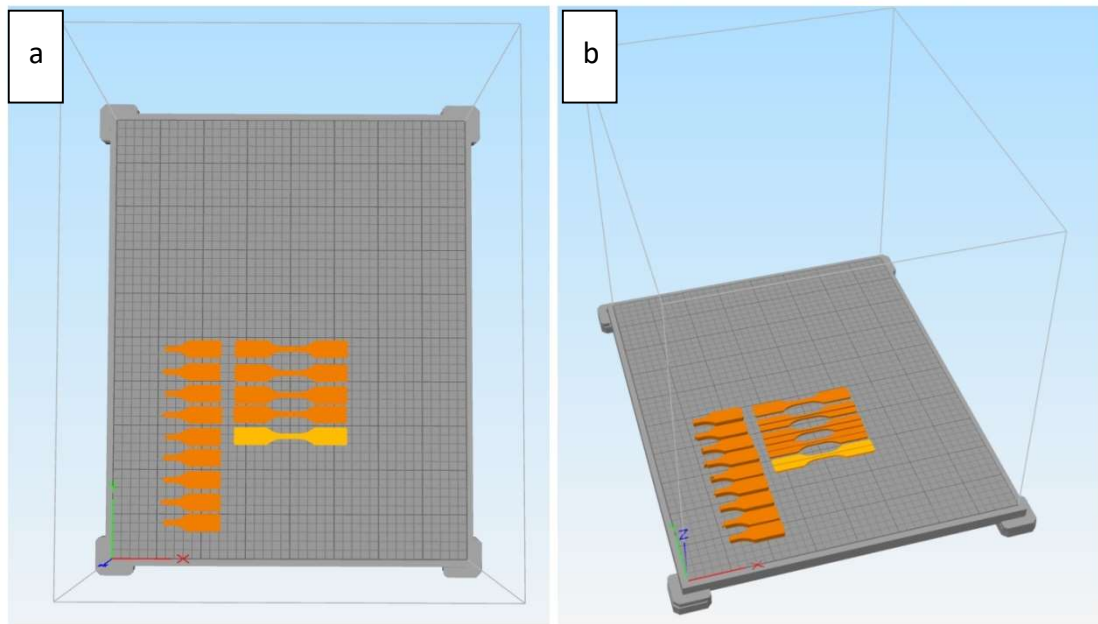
Layouts of samples/inserts in PLA specimens for FDM printing platform, in which (a) top view; (b) side view.
